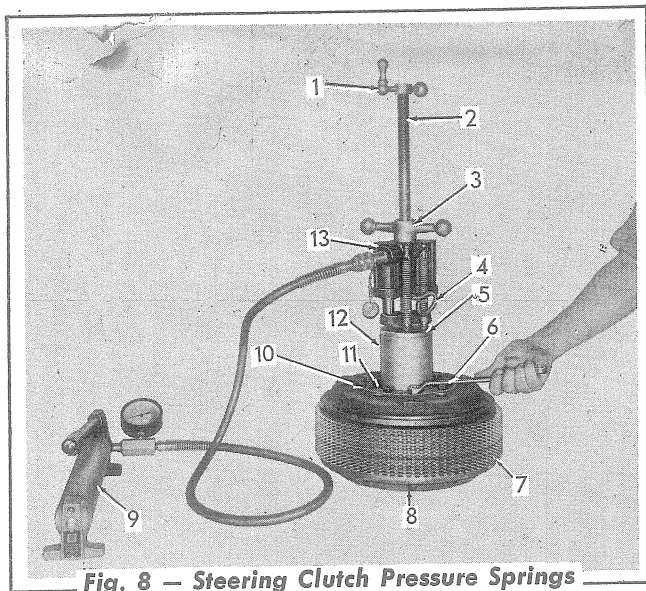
Steering Clutch Pressure Springs Compressed to Remove Throwout Plate Capscrews
